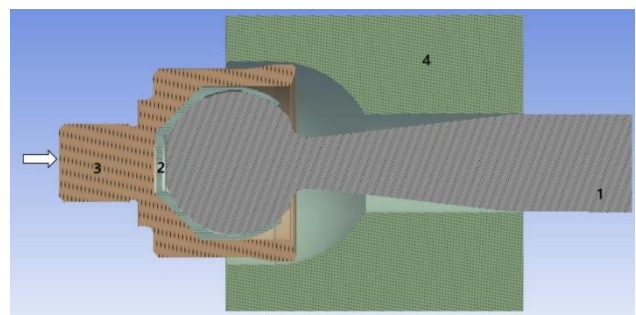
Forming a mold model of the inner tie-rod end stud Here, 1 – Inner tie-rod end; 2 – POM bearing; 3 – Inner tie-rod end stud; 4 – Inner tie-rod end stud forming mould.
